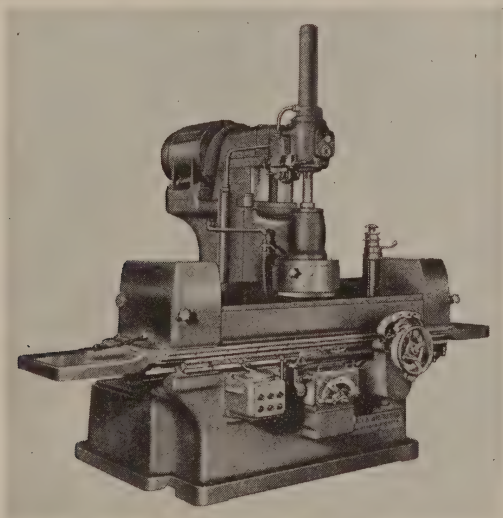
Hydraulically driven vertical-spindle surface-grinding machine. Has stepless table speeds from 0 to 100 ft. per min., automatic vertical feed of wheel from 0.00025 to 0.005 in., built-in wheel dresser and push-button control for all motors. (*Courtesy of Pratt & Whitney Company.*)
